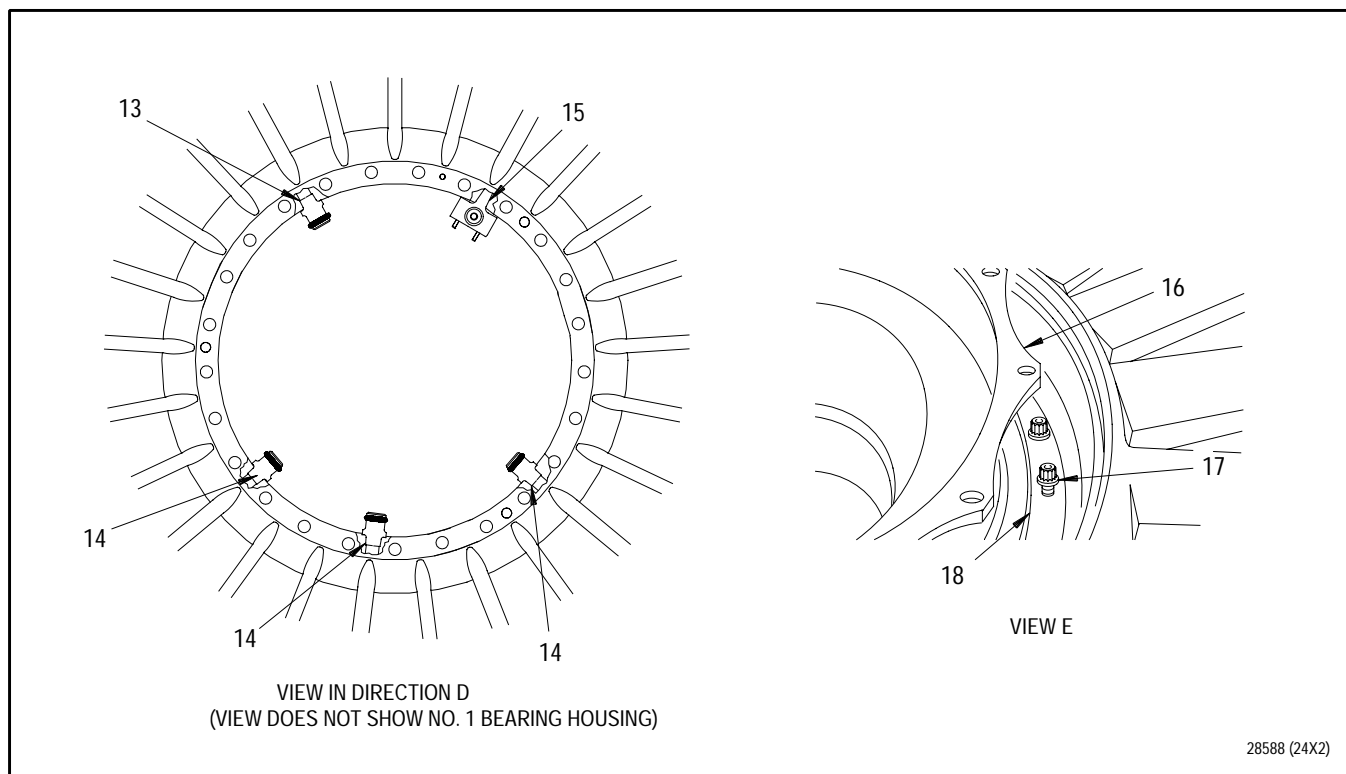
Fan Inlet Case - Removal (Sheet 2 of 2)
